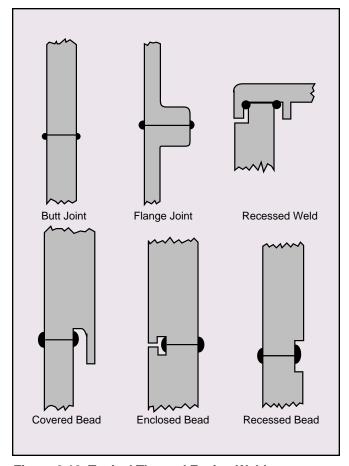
Typical Thermal Fusion Weld Joint Designs
